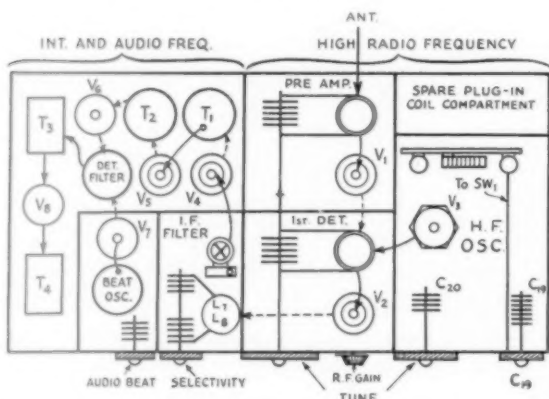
A SUGGESTED PLAN FOR A SINGLE-DECK MODEL
